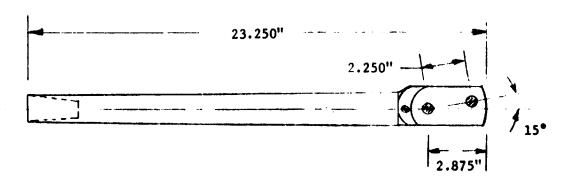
STING HOLDER (MSFC DRAWING 80M51175)
